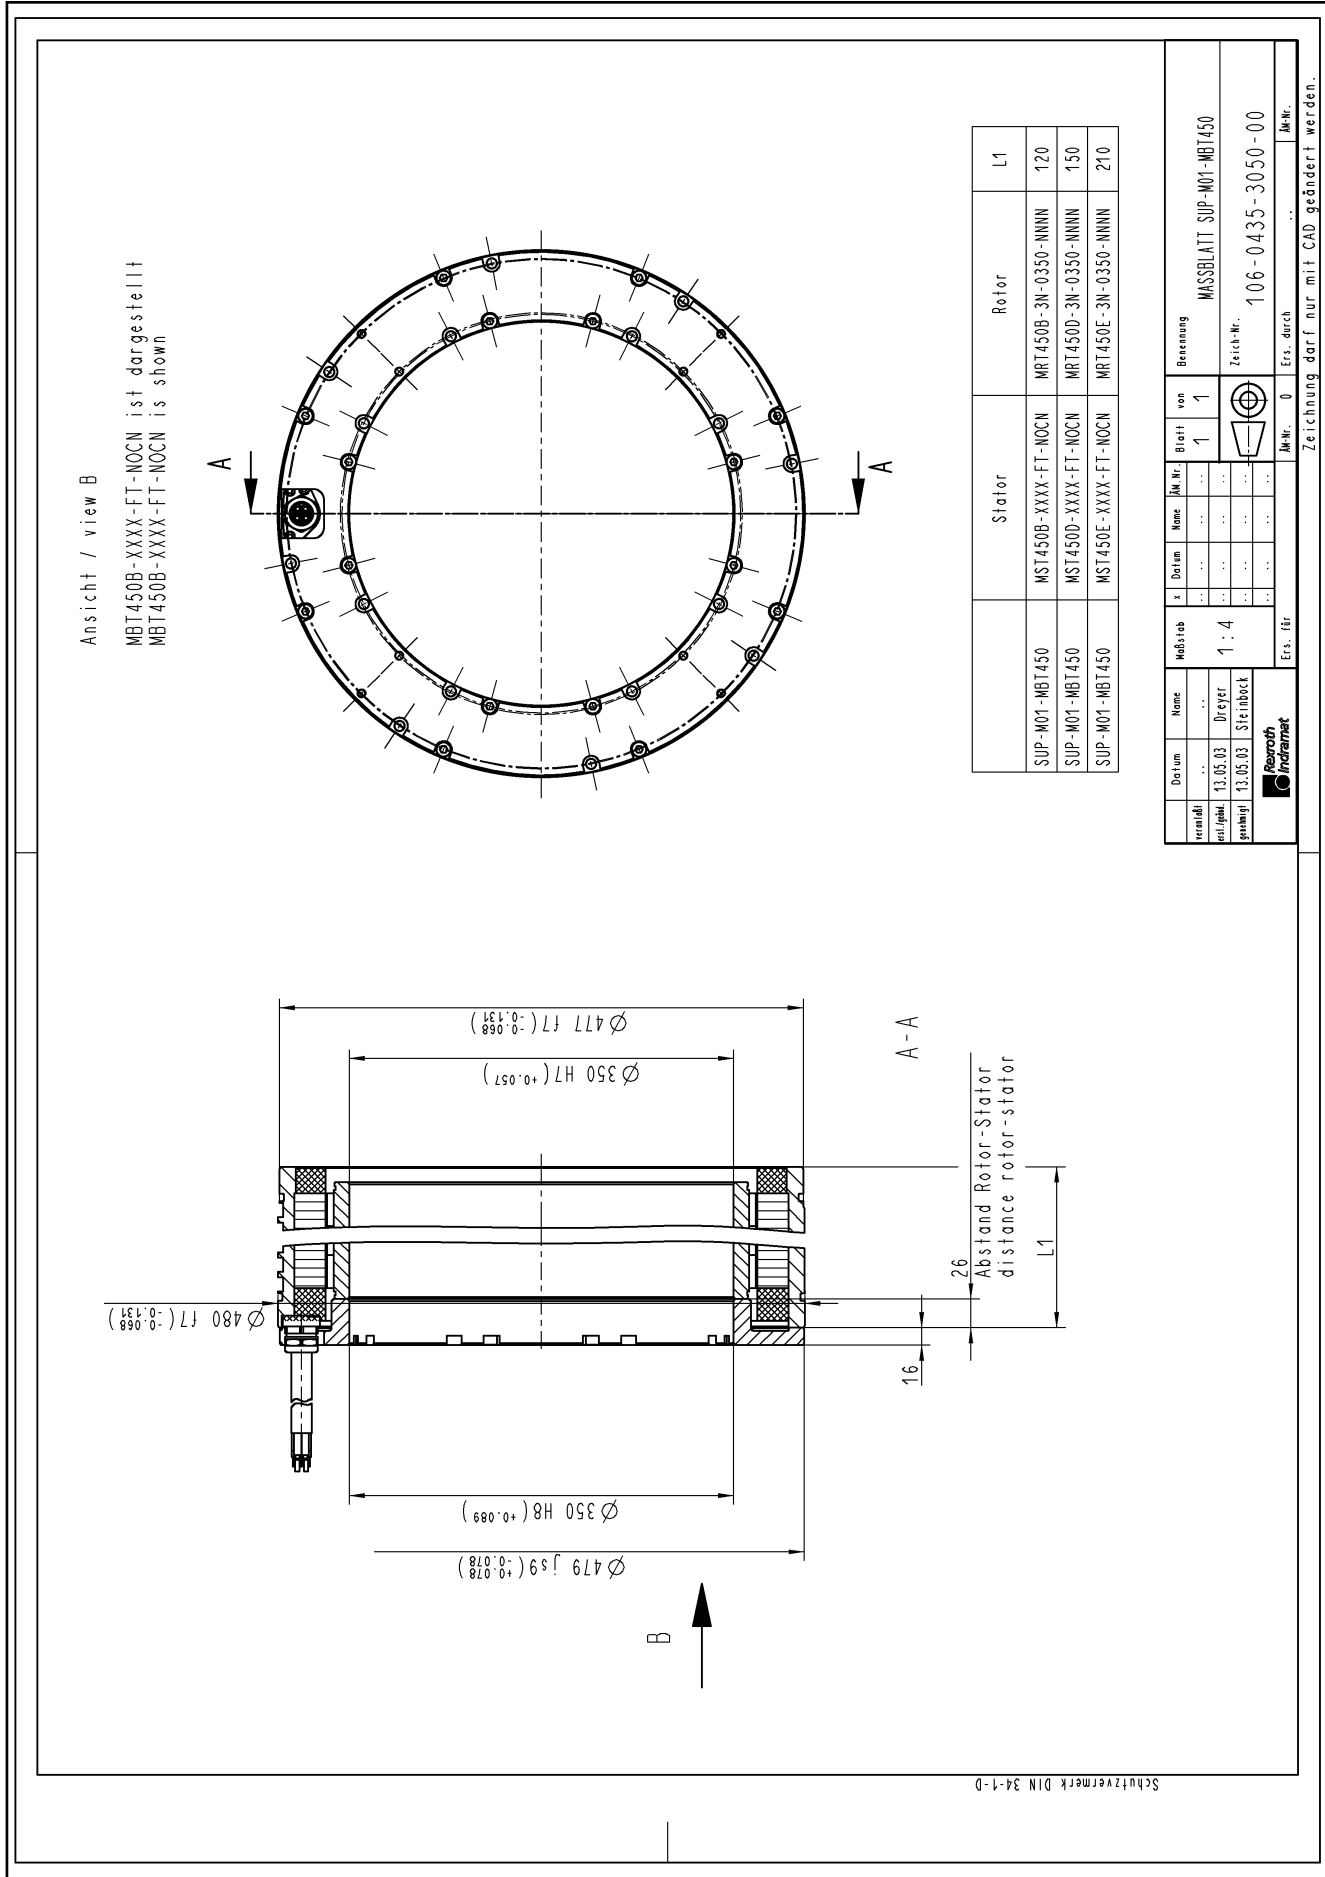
Dimension sheet for mounting ring in SUP-M01-MBT450
